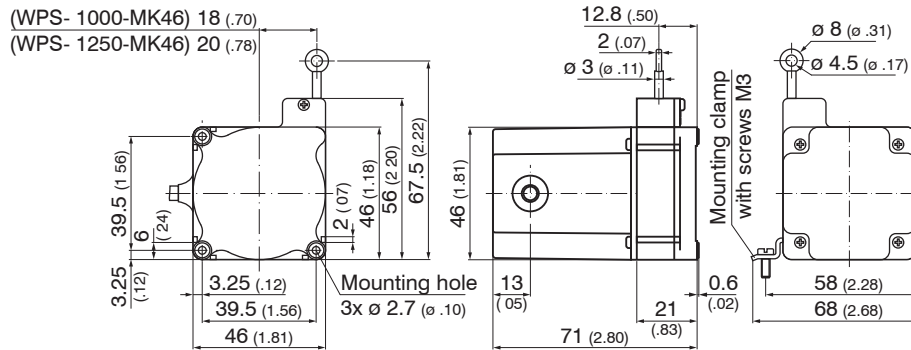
Dimensional drawing WPS- ... -MK46-CR, with potentiometer and radial cable, dimensions in mm (inches), not to scale
